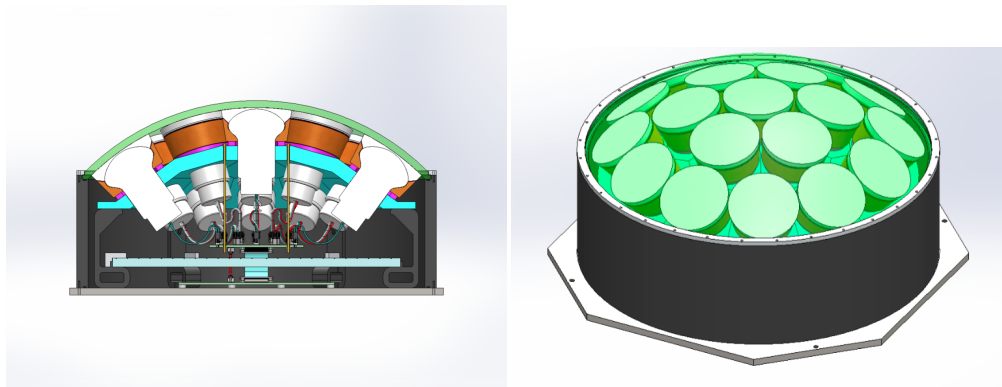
Left: The cross section view of the mPMT module with 19 8 cm diameter inward-facing PMTs, and integrated front-end electronics. Right: The external view of the mPMT module.
